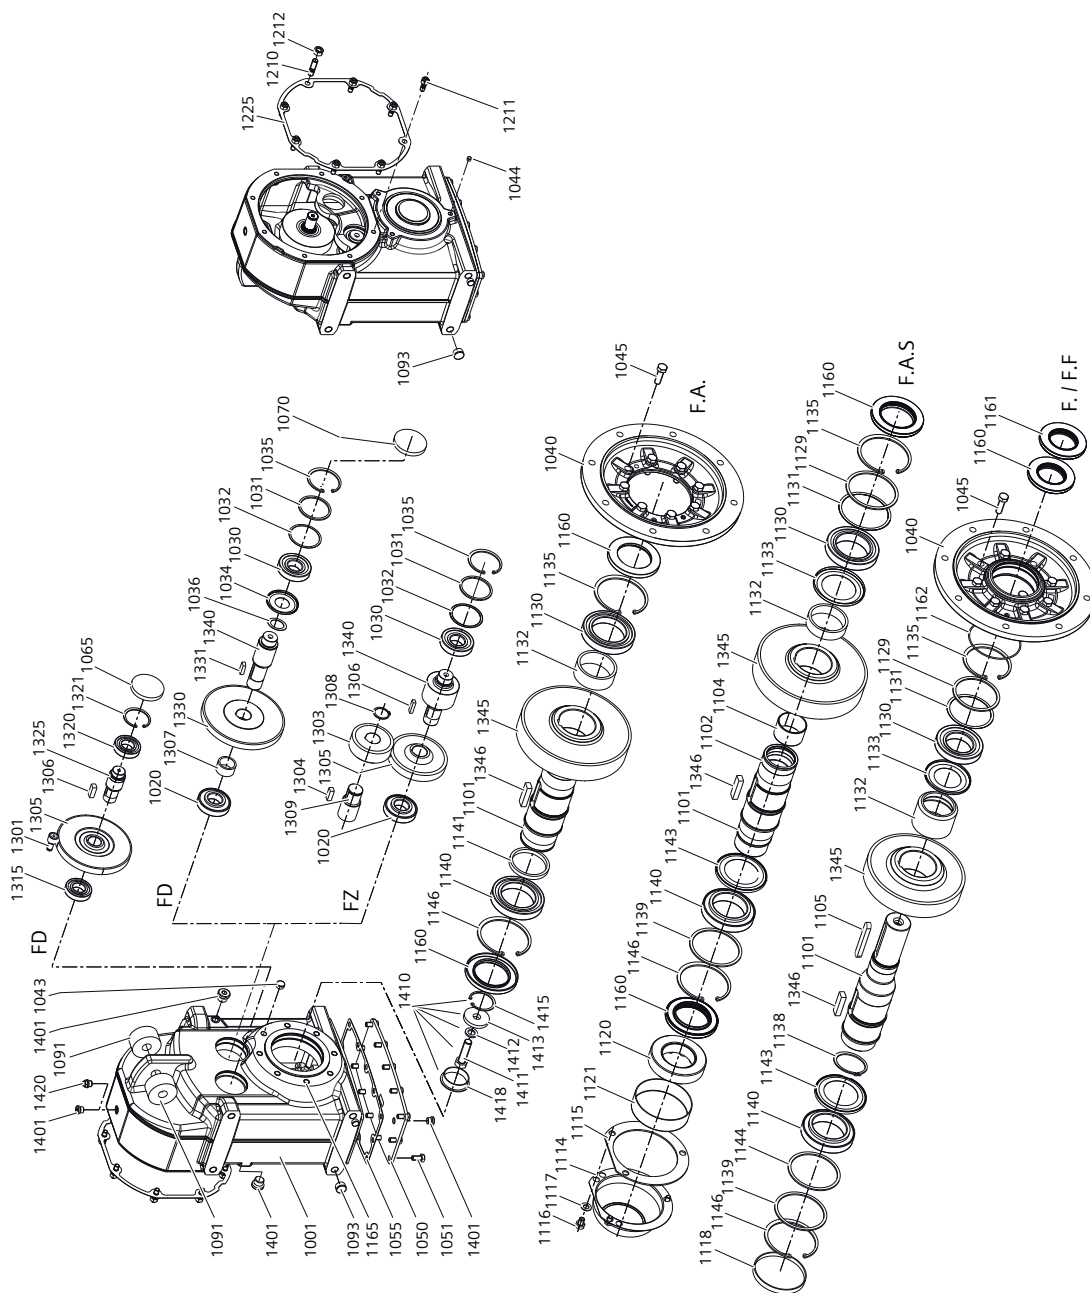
Parallel shaft gearbox F, sizes 29-189
